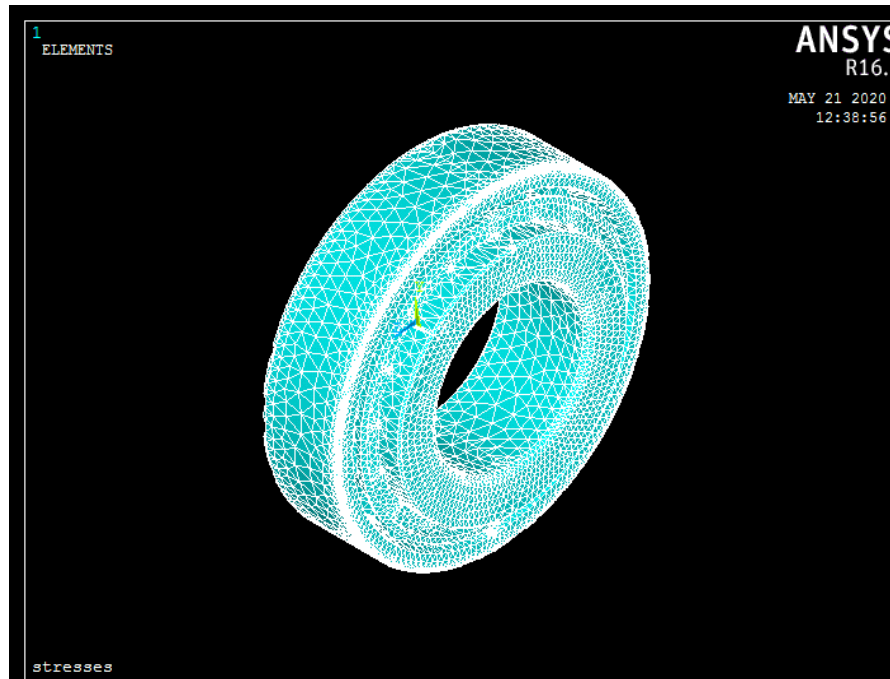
10 Meshed model of taper roller bearing with outer race defect
